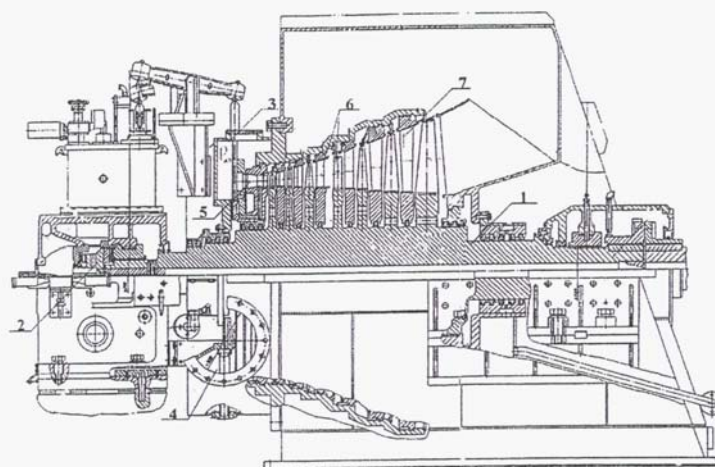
Turbine manufactured at SC Kaluga Turbine Plant for San Jacinto geothermal power plant of 20-25 MW,  $p_o = 0,8 \pm 0,2$  Mpa, and  $p_c = 0,012$  Mpa. (1) Integral-disk rotor; (2) lubrication pump and radial-and-thrust bearing; (3) steam inlet; (4) steam exhaust; (5) regulating (revolving) diaphragm; (6) moisture-separating turbine stage; (7) diaphragm capable of in-channel separation of moisture.
